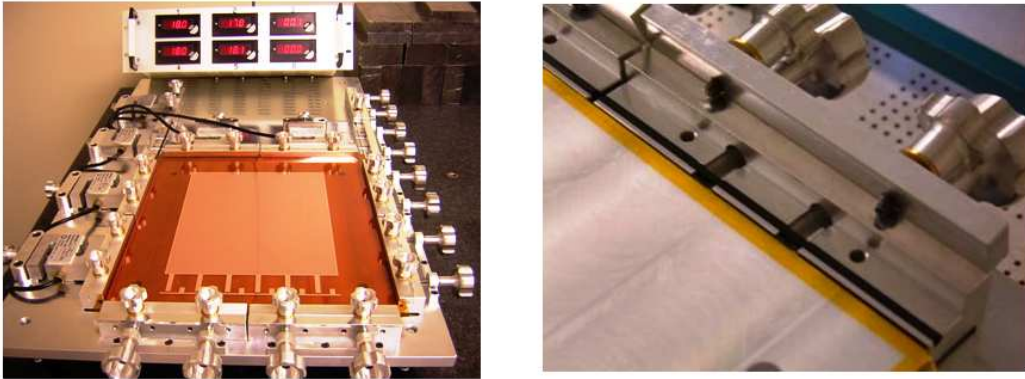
Left: The GEM foil under stretching; Right: a close view of the jaw, equipped with a plastic O-ring, used to clamp the foil.
